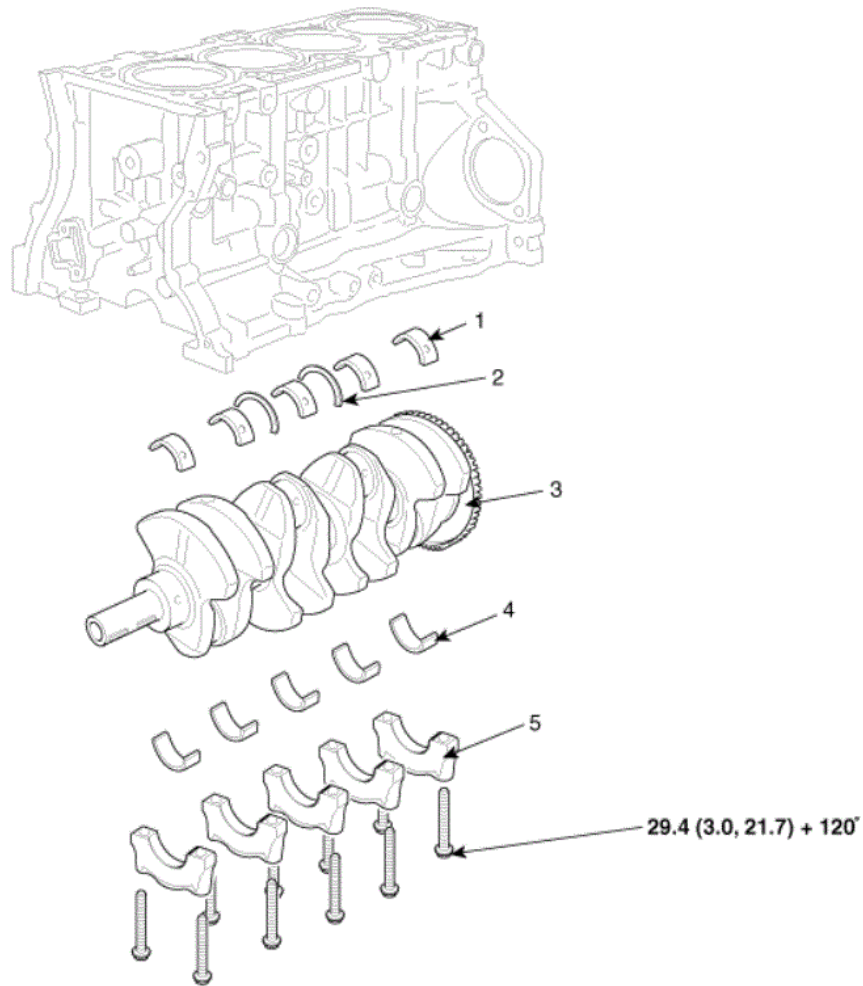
Exploded View Of Cylinder Block With Torque Specifications (1 Of 2)
